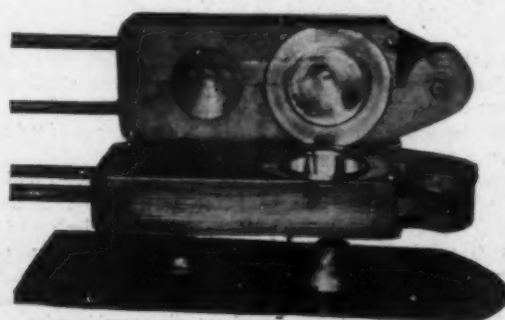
TANK BULB HINGED SHAPING MOLDS AND CONE PLATE SHAPER.
